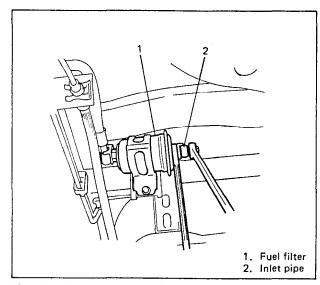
C-12 Disconnecting Fuel Filter Inlet Pipe
